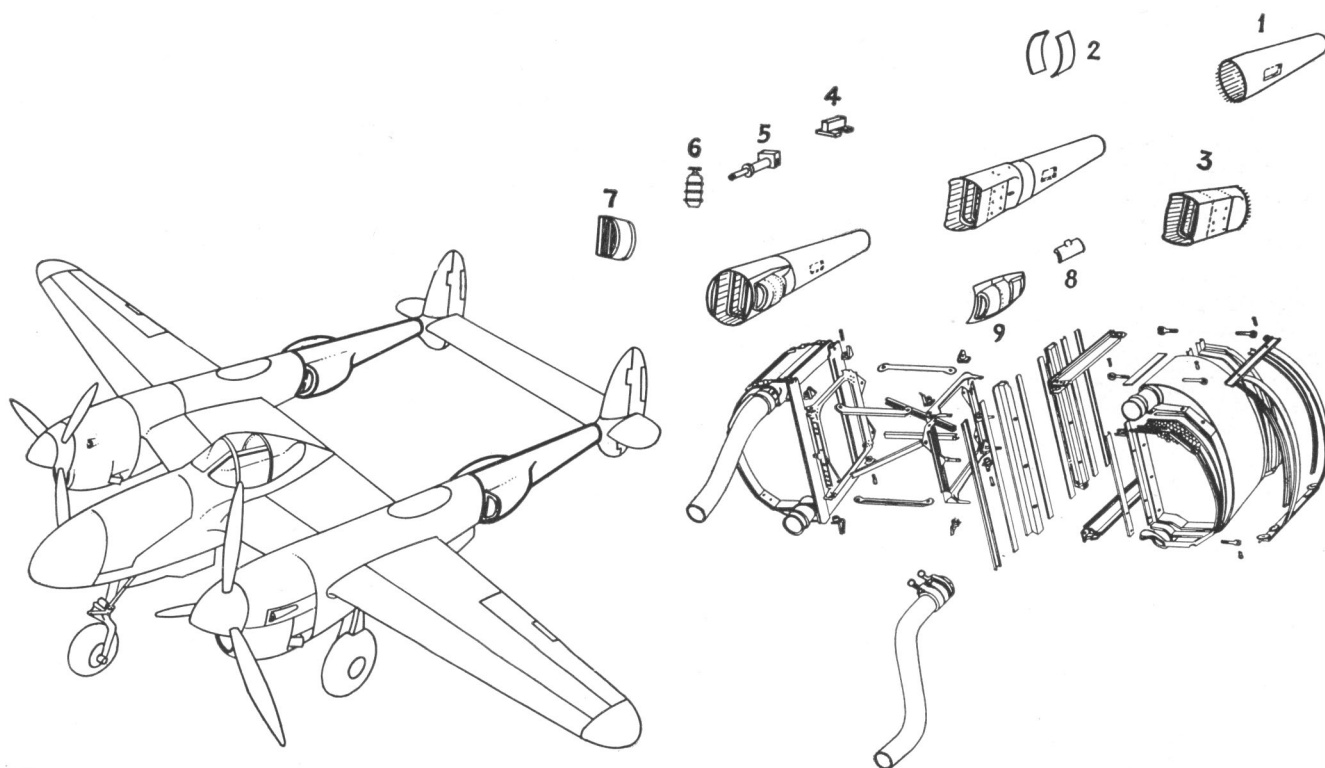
Exploded view showing the make-up of the aft boom assembly, including: (1) tail cone, designed to be built as a complete sub-assembly; (2) skin splices; (3) "hourglass" assembly; (4) battery; (5) hydraulic unit; (6) oxygen bottle; (7) coolant radiator; (8) aft baggage door; (9) coolant radiator scoop. The detail insert at the lower right shows an exploded view of the coolant radiator assembly.
